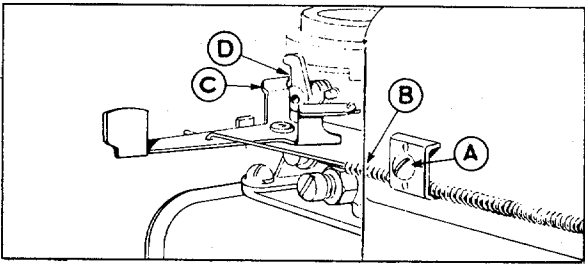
THROTTLE CONTROL ADJUSTMENT
